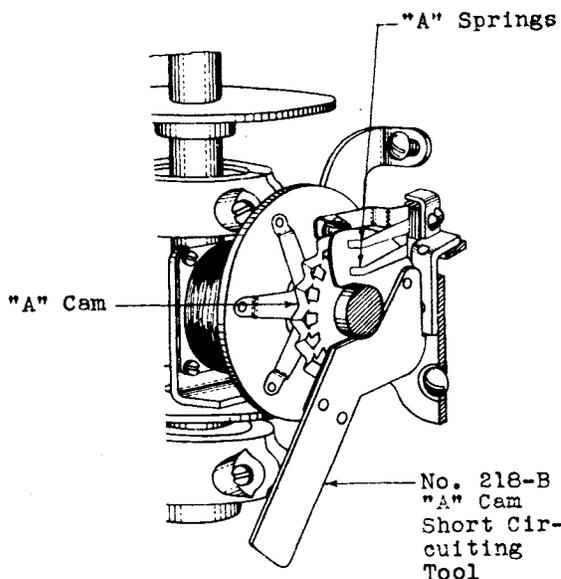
Method of Rotating Sequence Switches Electrically by Means of the No. 218-B "A" Cam Short Circuiting Tool
